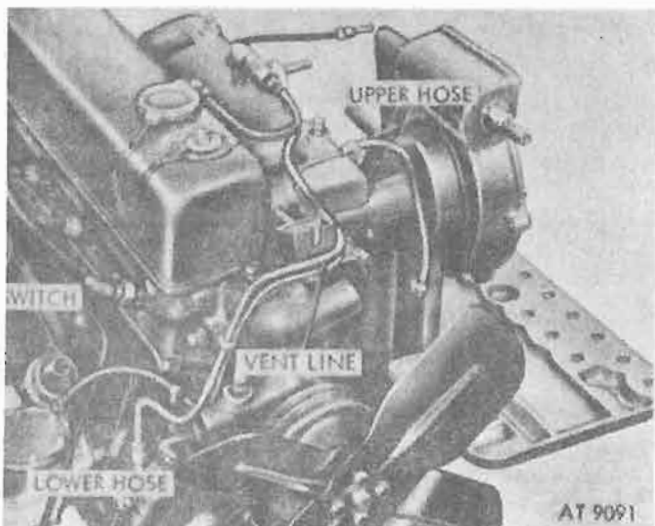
Fuel pump safety switch (oil pressure safety switch) ventilation line and attaching parts (M151, M151A1, M151A1C and M718 vehicles).
